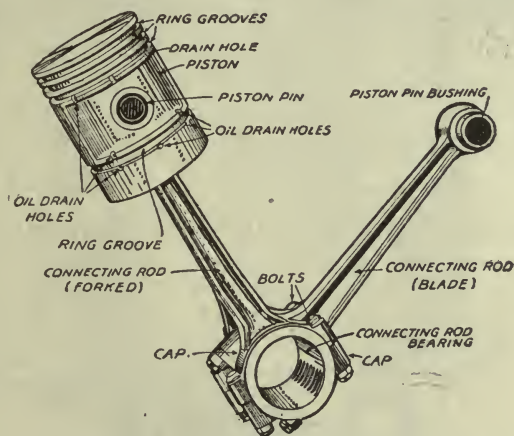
Cole 8 Connecting rods are of the Yoked Type. The inner bearing is non-adjustable. When the play is too great these are replaced with new ones. The Blade rod is adjustable. Its bearings are fitted over the back of the inner bearing which is fastened to the yoked rod.
